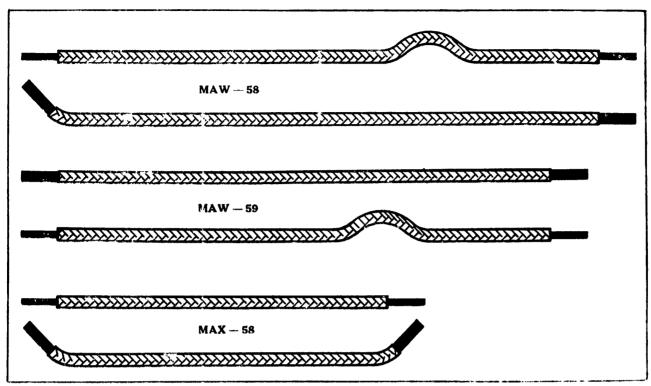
Full size Drawings of the three Auto-Lite Equalizer Wires for modernizing Series MAW and MAX Starting Motors. To identify a wire match it with the drawing.
